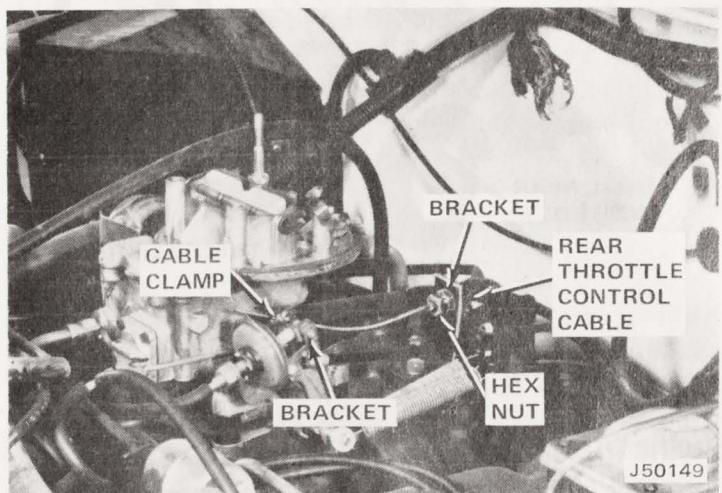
Rear Throttle Control Cable at Carburetor
